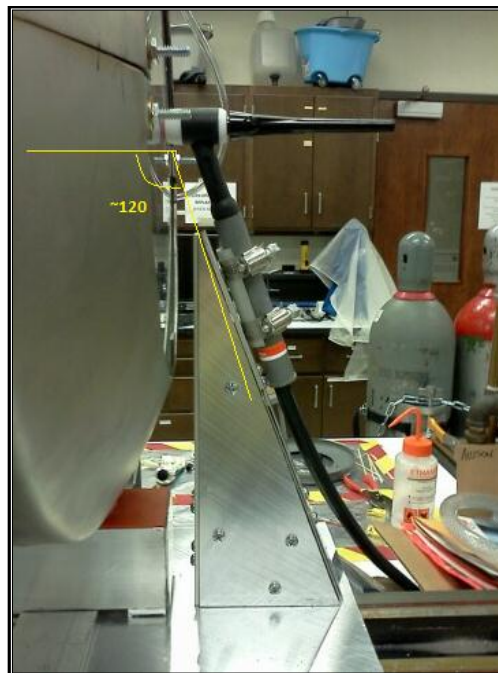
The angle of the tungsten stinger relative to the torch head.
